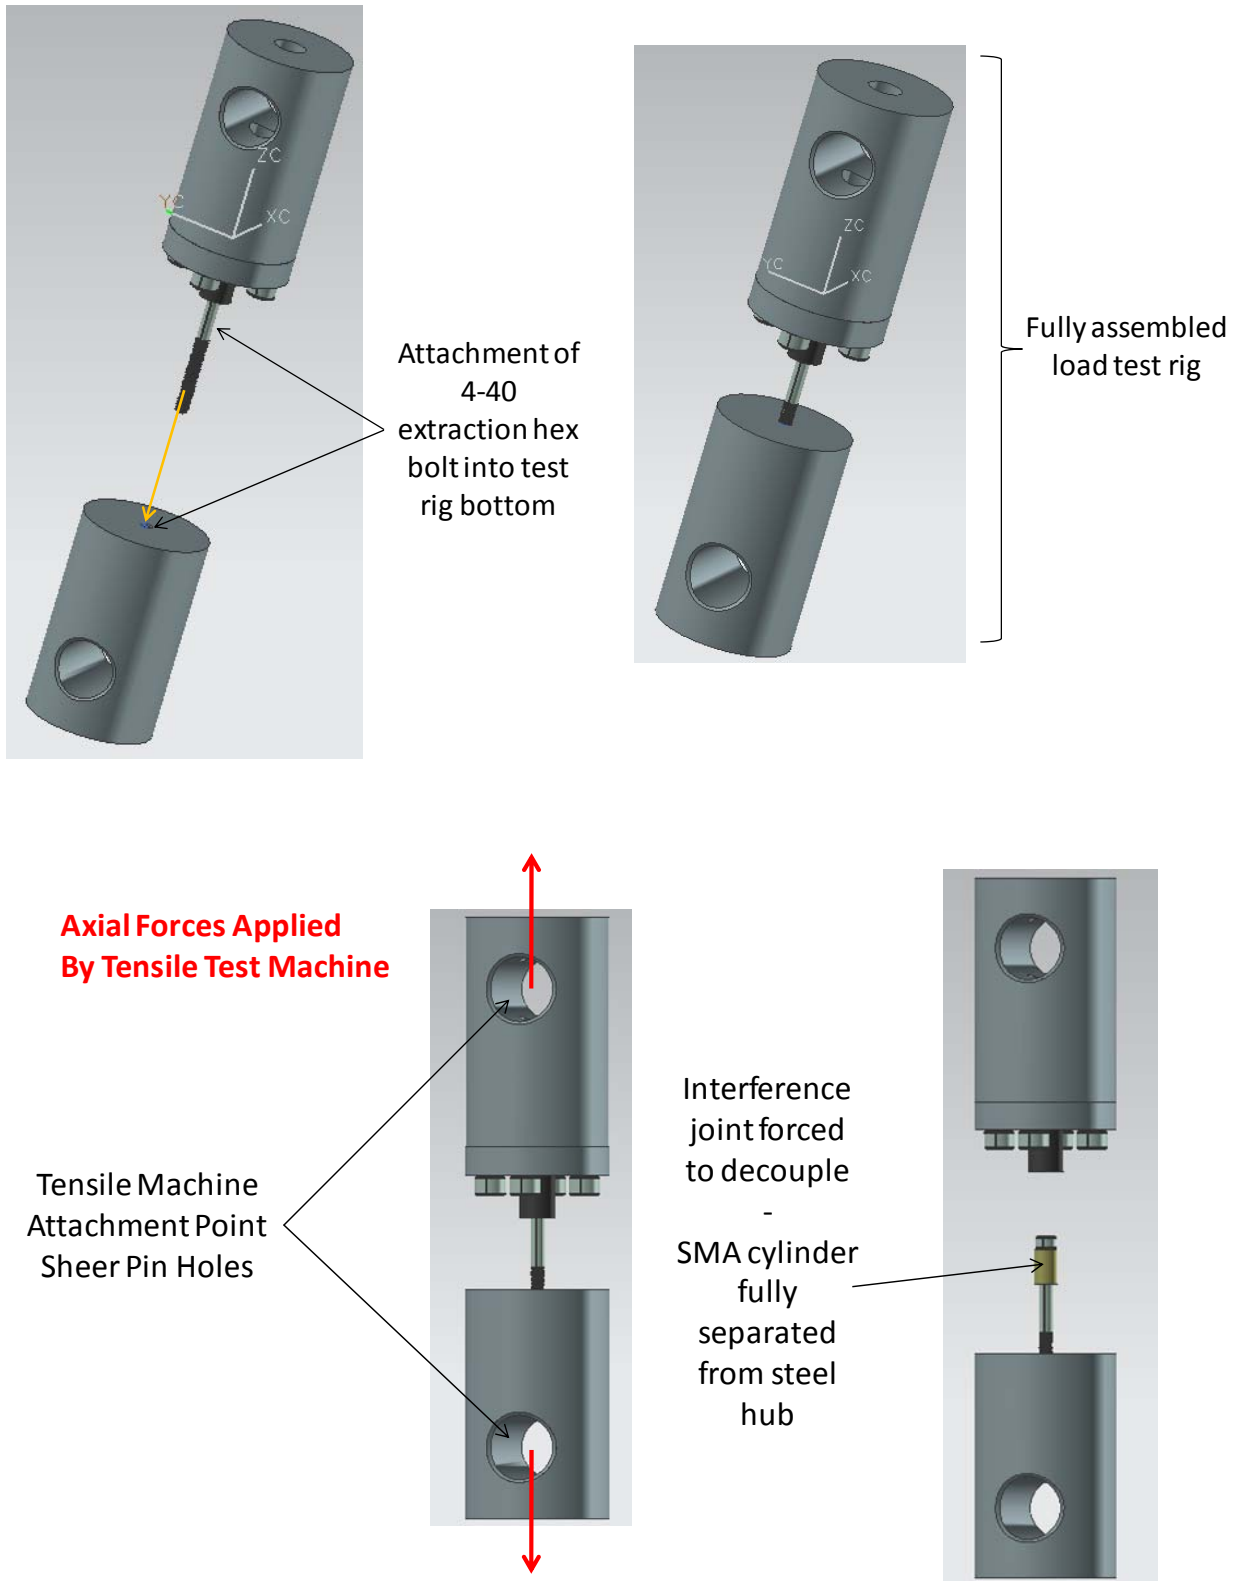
Assembly and Operation of SMA²C Micro-Coupling Load Test Rig
